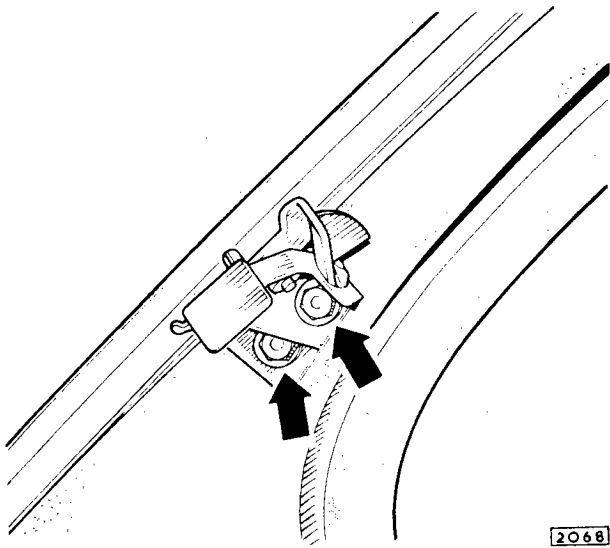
Showing the adjustment for the luggage compartment lid striker bracket (Fixed Head Coupe).
